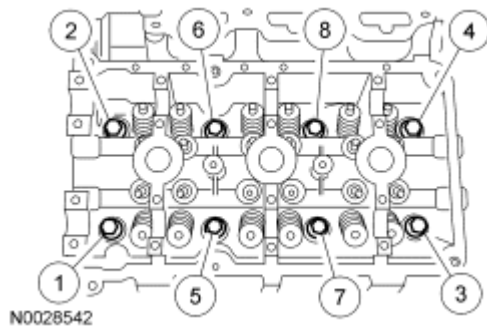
Identifying Loosening Sequence Of Cylinder Heads Bolts
